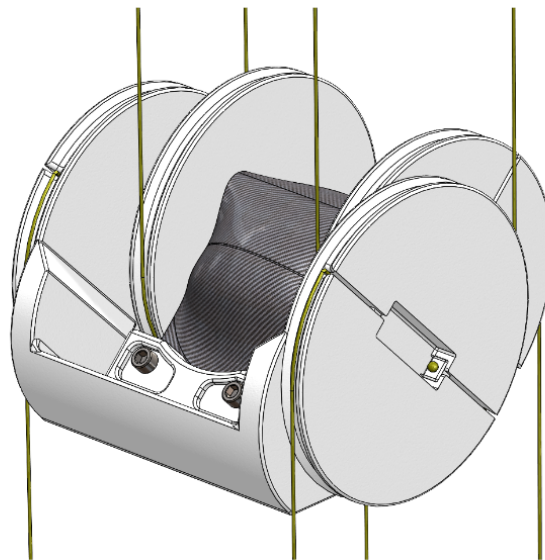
Opterus R&D’s current LOC hinge test fixture.
